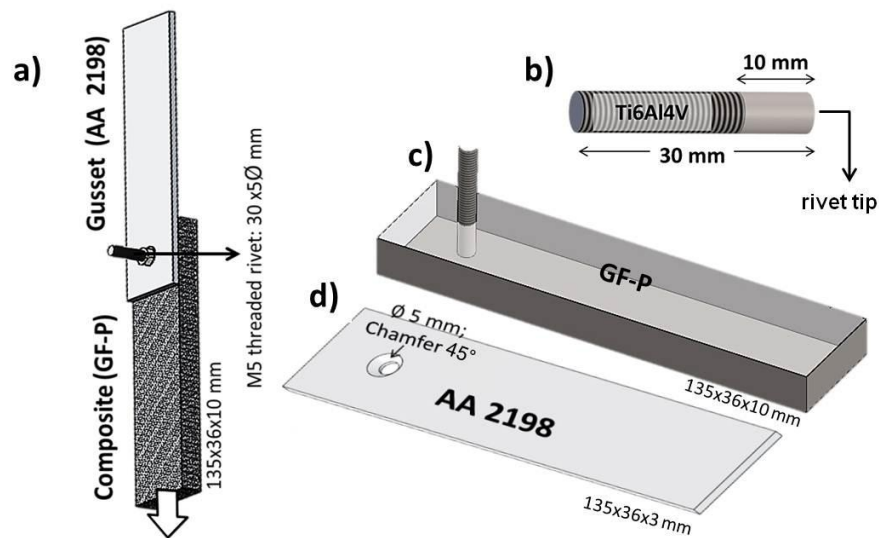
a) Geometry of the single overlap specimen for lap shear testing; b) geometry of the metallic rivet (partially threaded with M5); c) Ti-6Al-4V/GF-P friction-riveted joint and d) gusset plate of aluminum alloy AA 2198.
